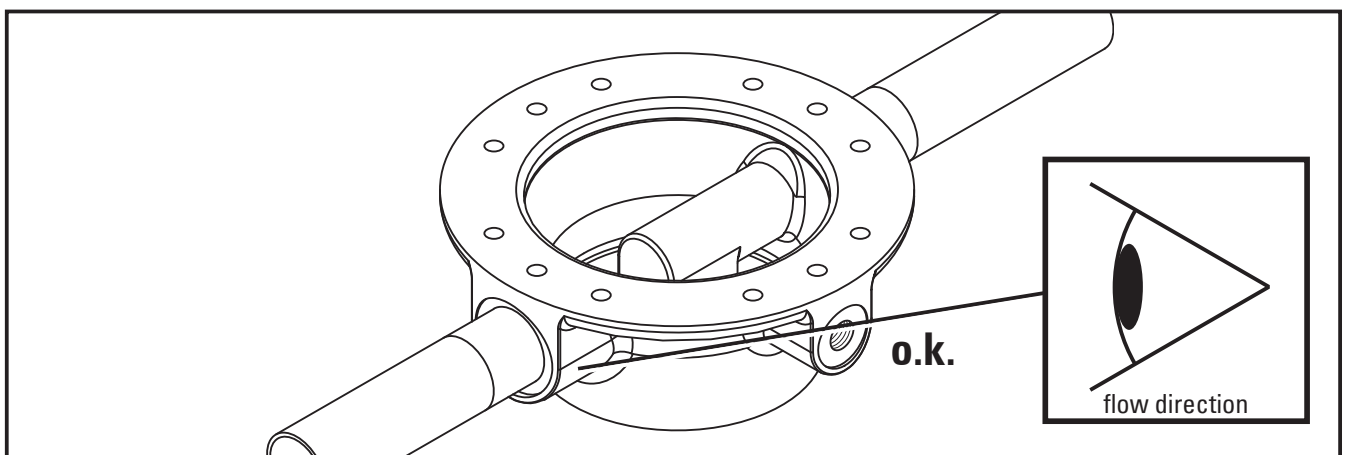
pressure reducer, welding of the body between two pipes (Fig. shows the body of Art. DM330362).
